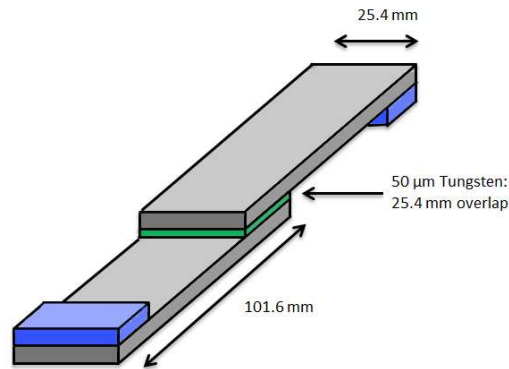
Lap shear test setup. Additional coupon parts (indicated in blue) were bonded to the ends of the specimen to reduce force eccentricity. As such the test method deviated from the ASTM standards.
